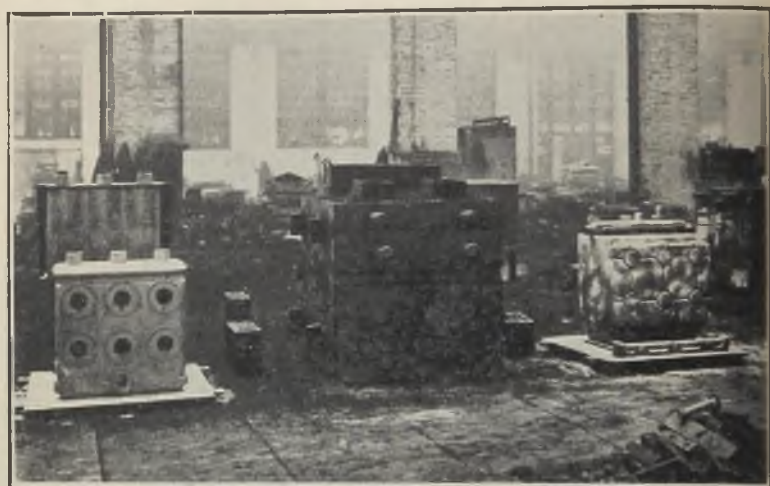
BOX-SHAPED ALUMINIUM-SILICON ALLOY CASTING.
